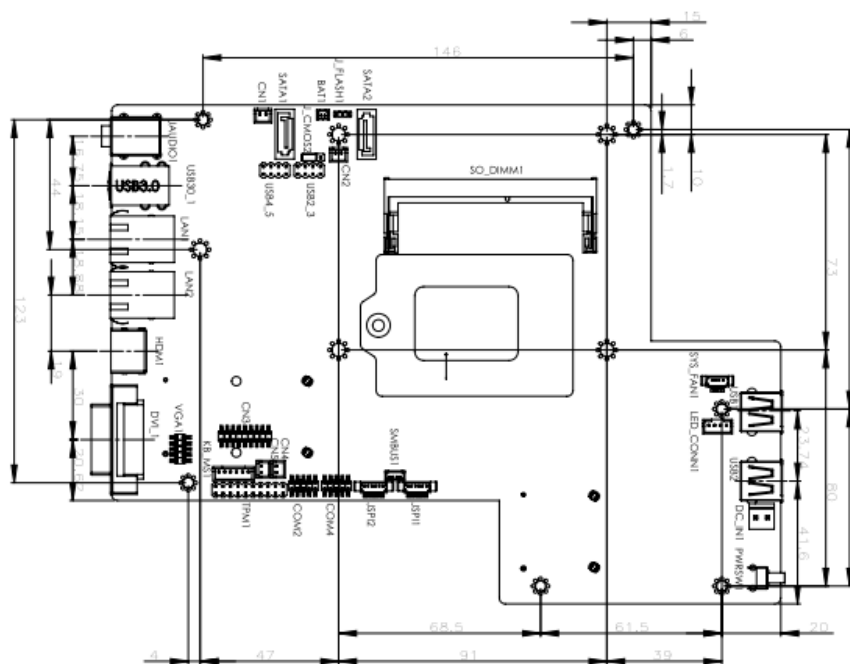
Motherboard Dimensions (Front Side) (mm)
